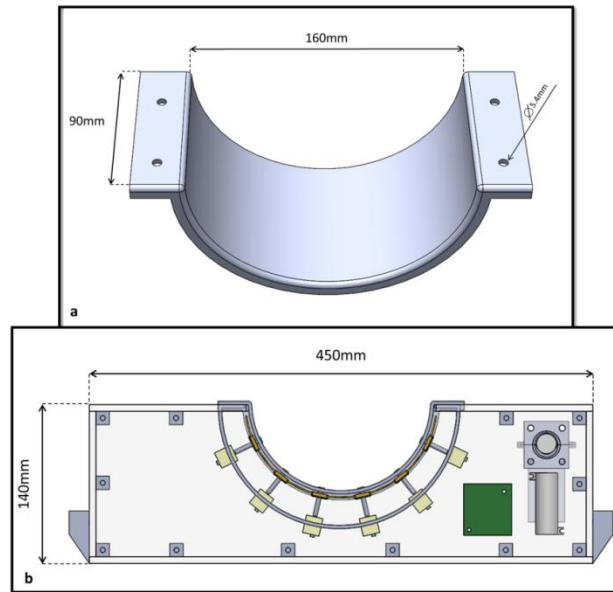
3D model of coil housing. (a) Detailed view of the neck holder. (b) Detailed frontal view of the coil holder.
